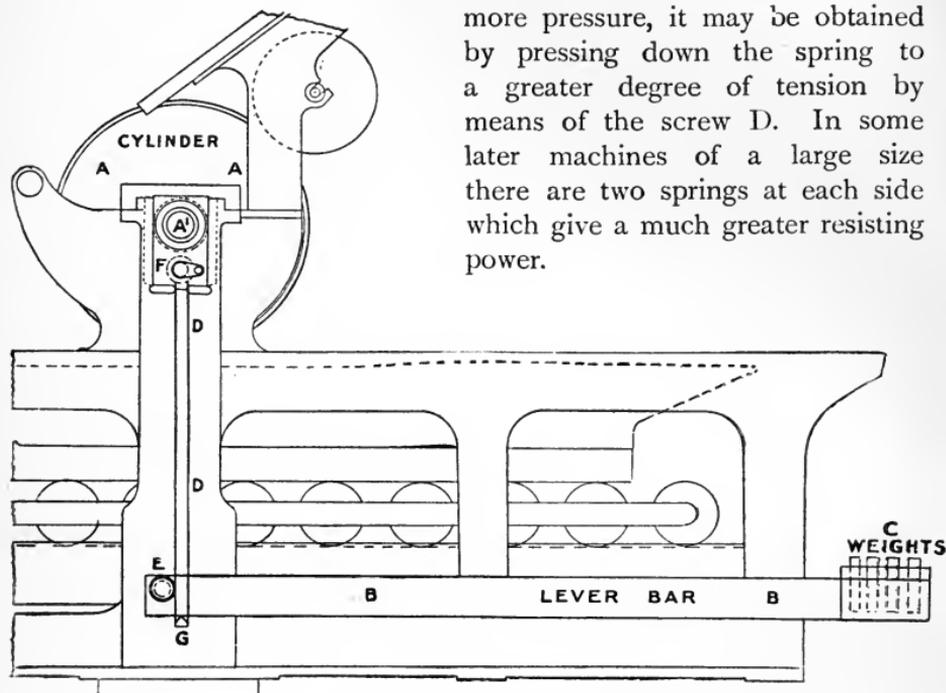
SHOWING LEVER ARRANGEMENT IN FURNIVAL MACHINE FOR OBTAINING PRESSURE.
